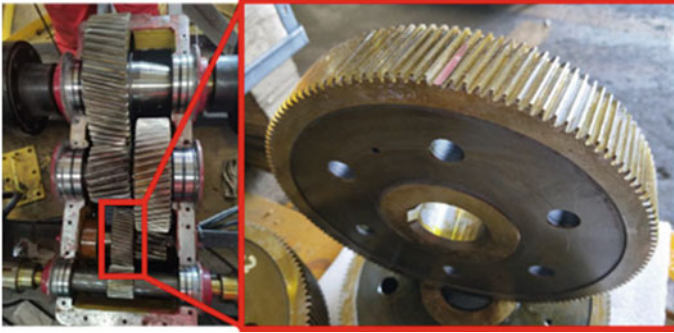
Scaled test rig of the quay crane gearbox and the faulty gear component
